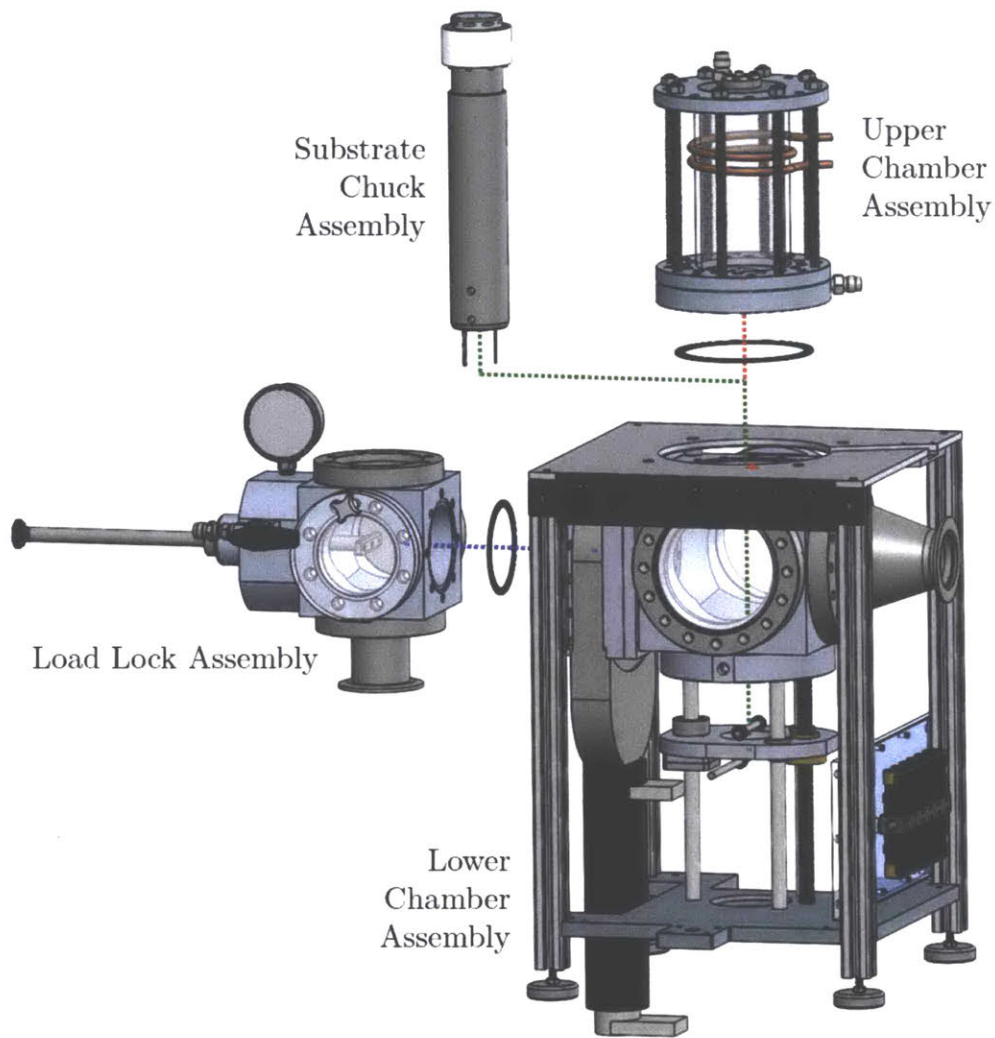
Exploded view of the four modular assemblies. The dotted lines indicate how the assembly mate with one another.
